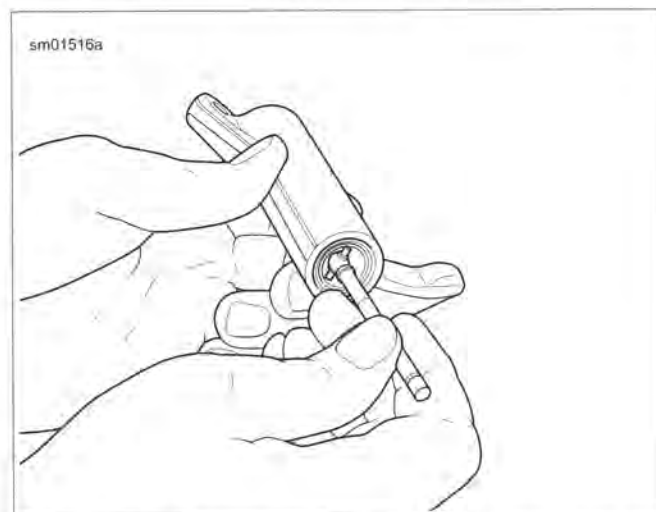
Measuring Rocker Arm Bushing Inner Diameter
